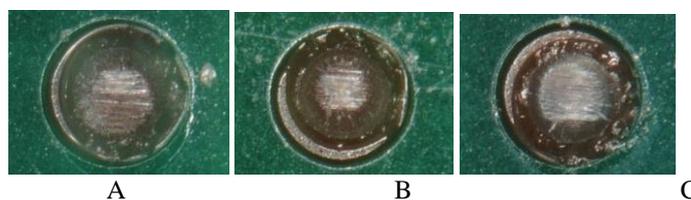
The pad cratering failure mode top view by OM after cold ball pull testing
